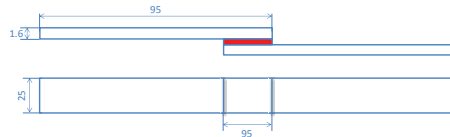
Sketch geometry of the specimens (dimensions in millimetres)
